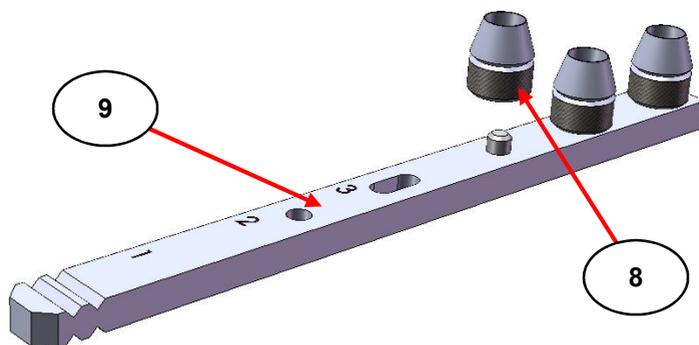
Fitting of Sample Cup to the Mount Holder Assembly
